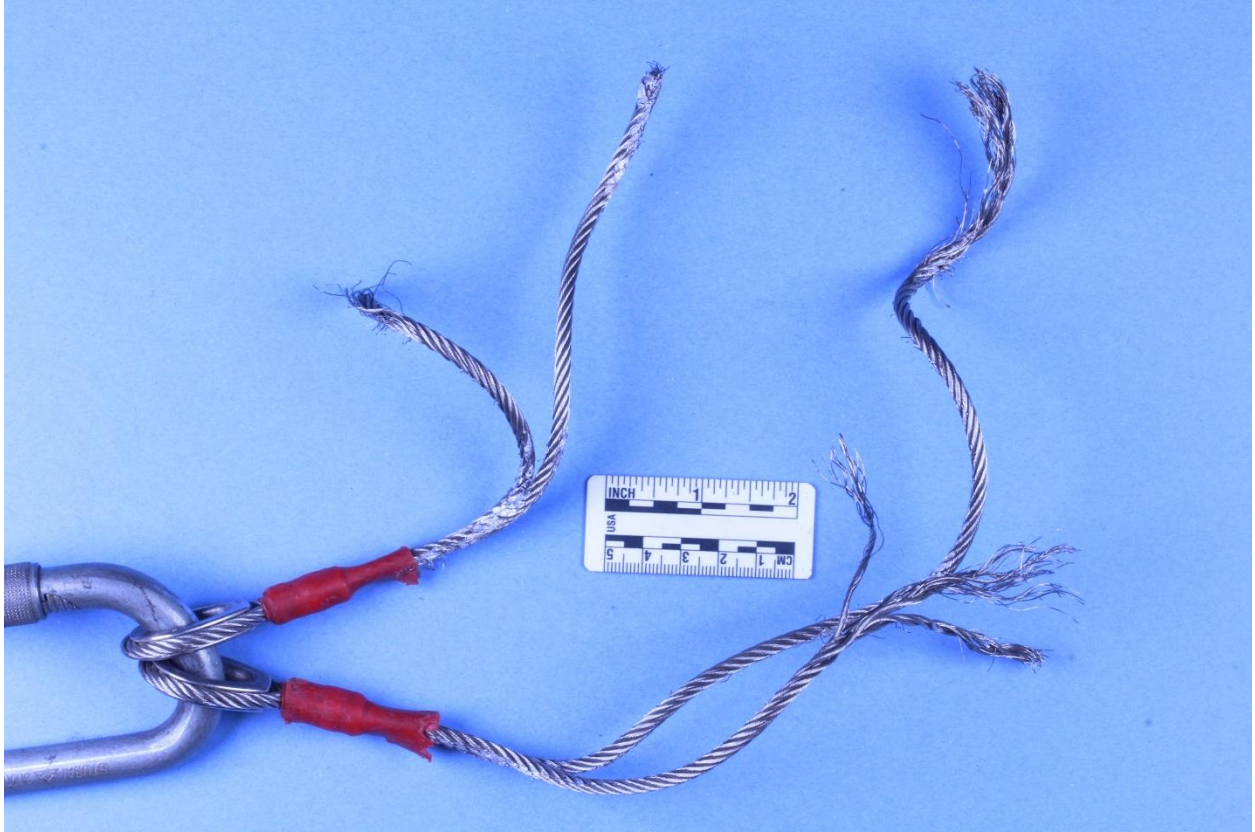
Load cables exhibiting overload (Burner Support Frame 4)
